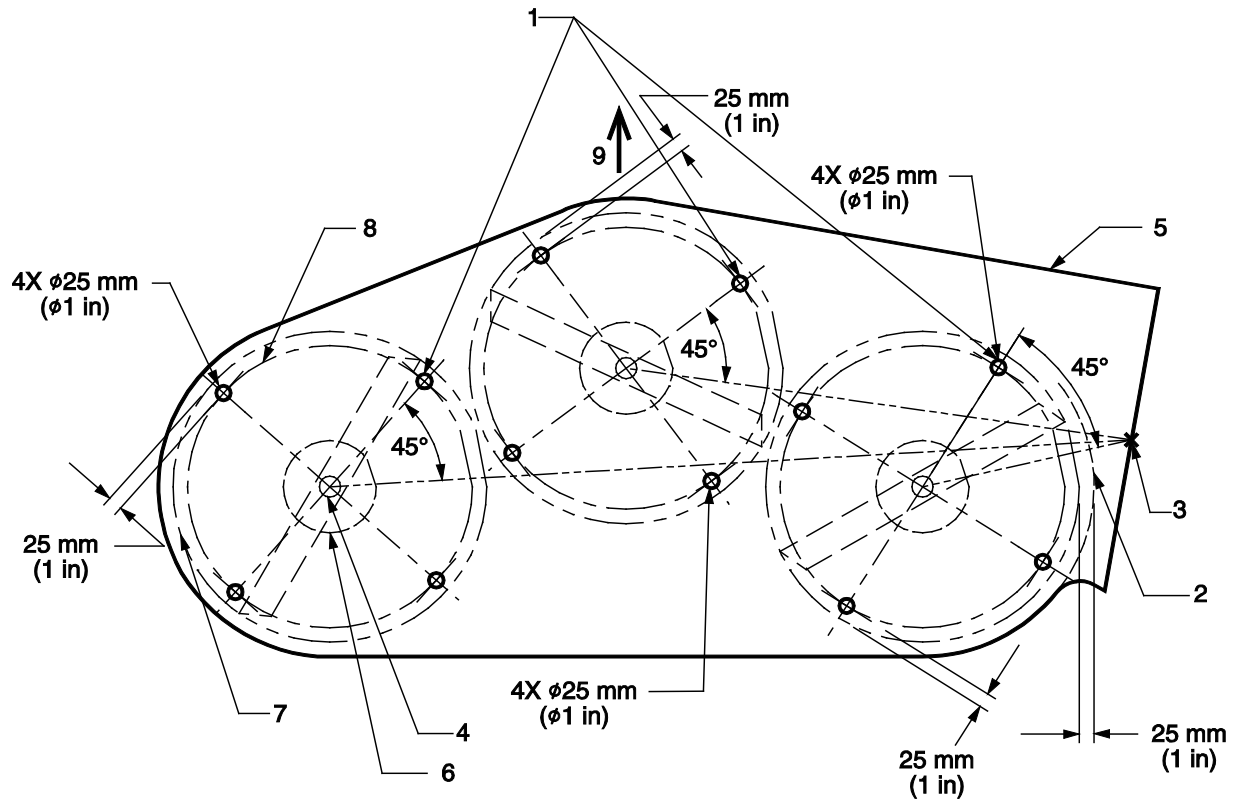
(b) – Plan view of a single-blade side discharge, fixture for structural integrity test
